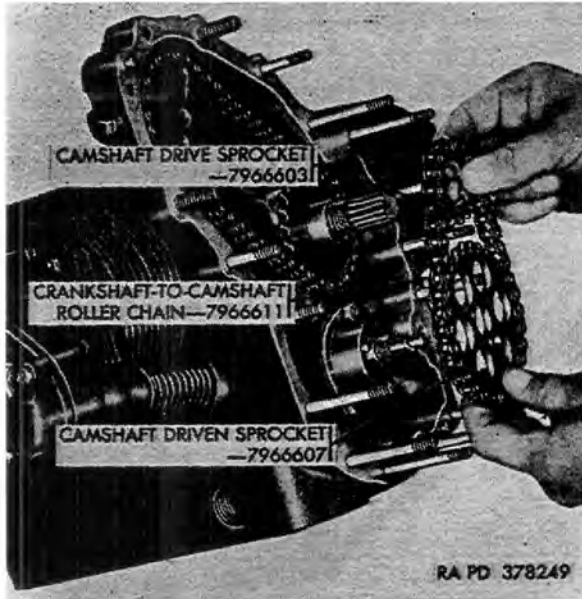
Removal of crankshaft-to-camshaft chain and sprockets.
